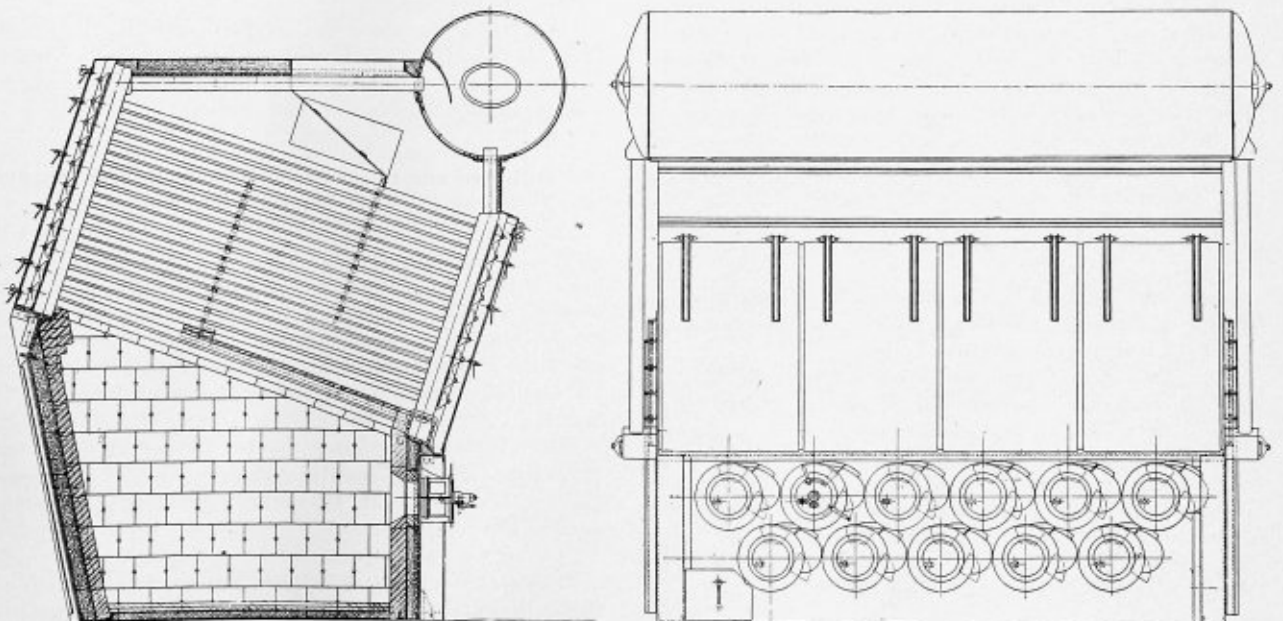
Babcock & Wilcox Watertube Boiler, Fitted with Peabody Burners for Burning Oil Fuel
